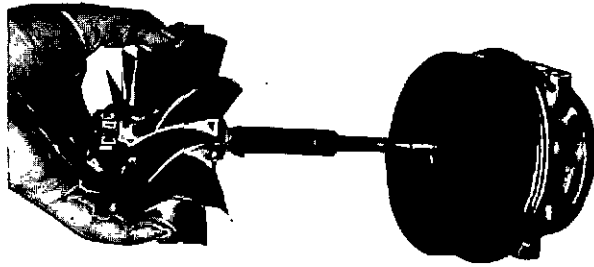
, (TA27). Installing the turbine wheel and shaft
